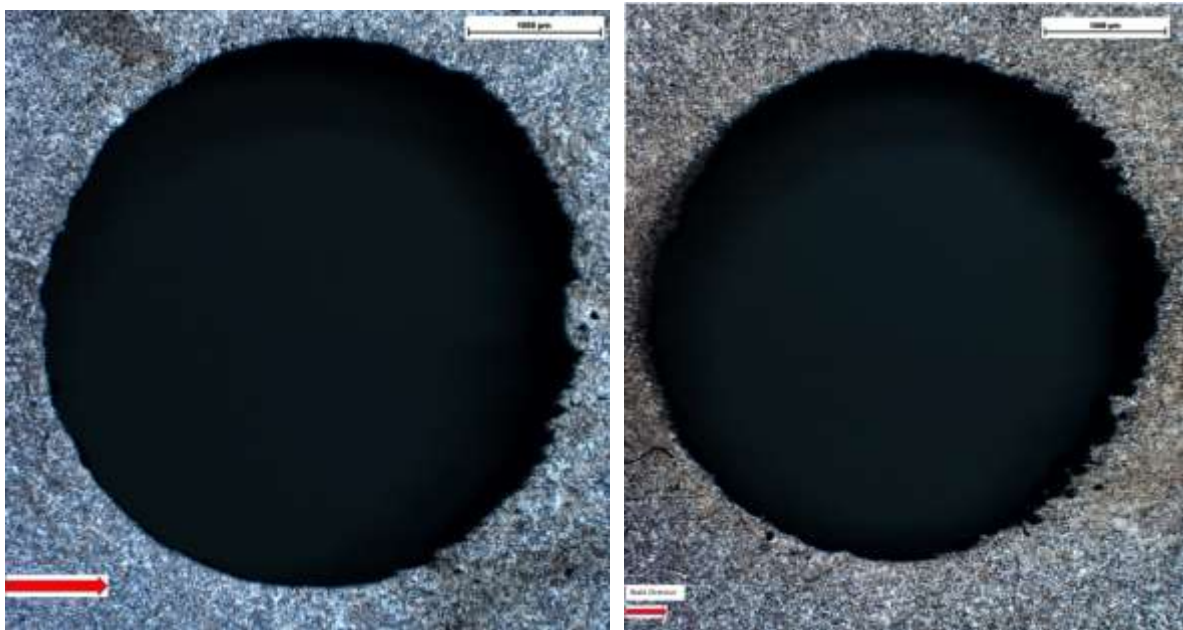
4.2 mm hole Maraging steel, (left) 60° printing inclination (right) 90° printing inclination
